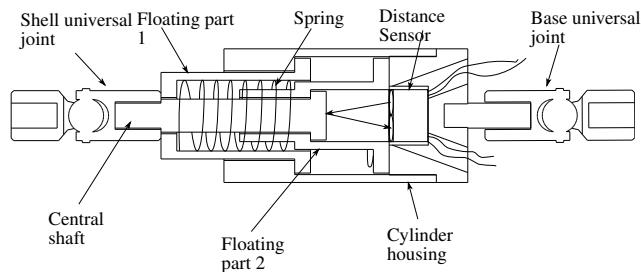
Section view of the passive prismatic joint used for the sensing mechanism.
